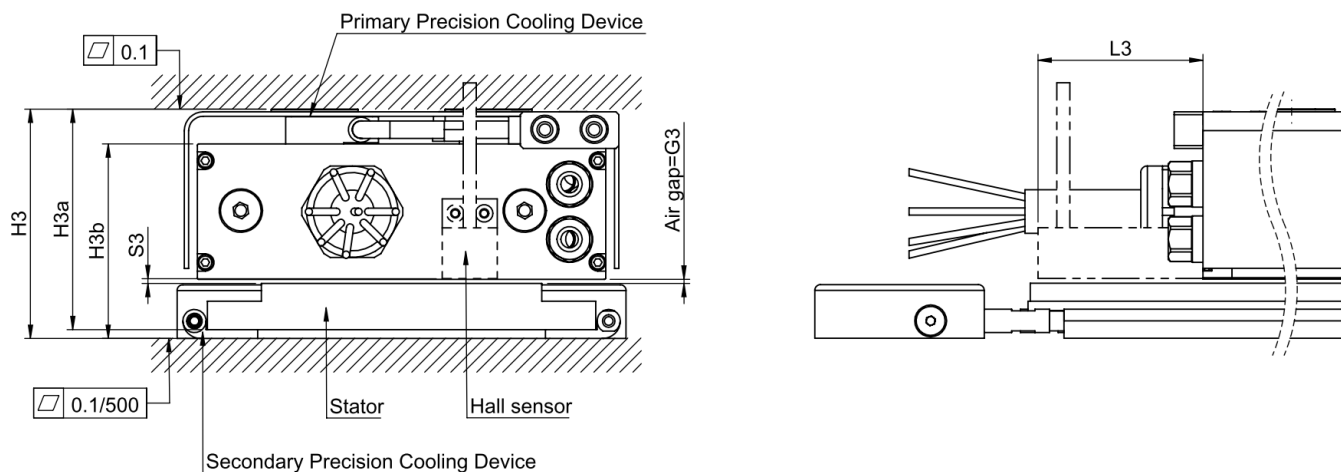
LMFP precision water-cooling linear motor assembly
